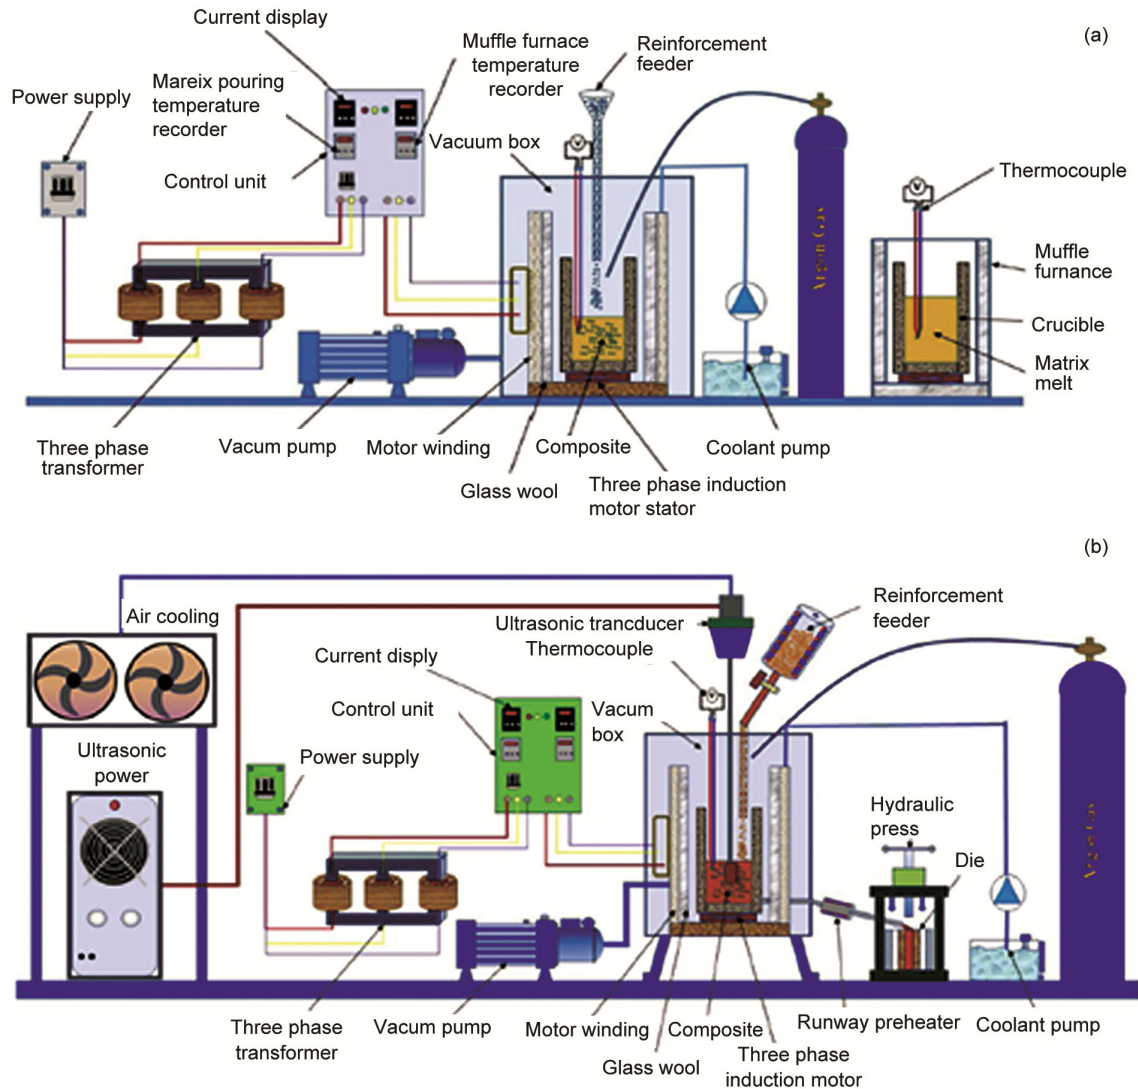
Stir casting process setup (a) electromagnetic stirring and (b) squeezed vacuum-based stir casting⁸.
